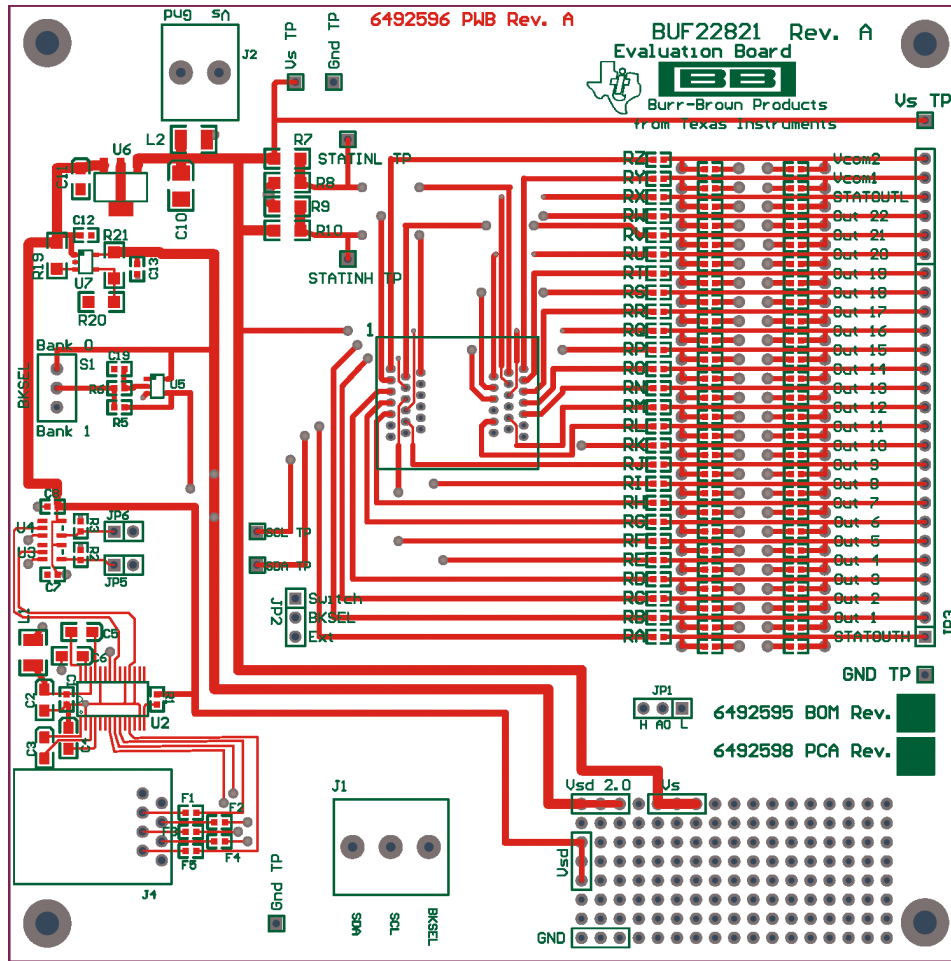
BUF22821EVM PCB Top Layer (Component Side)
